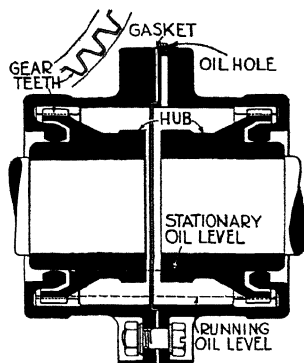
Bath-oiled, gear-type flexible coupling. (Courtesy Socony-Vacuum Oil Co.)
